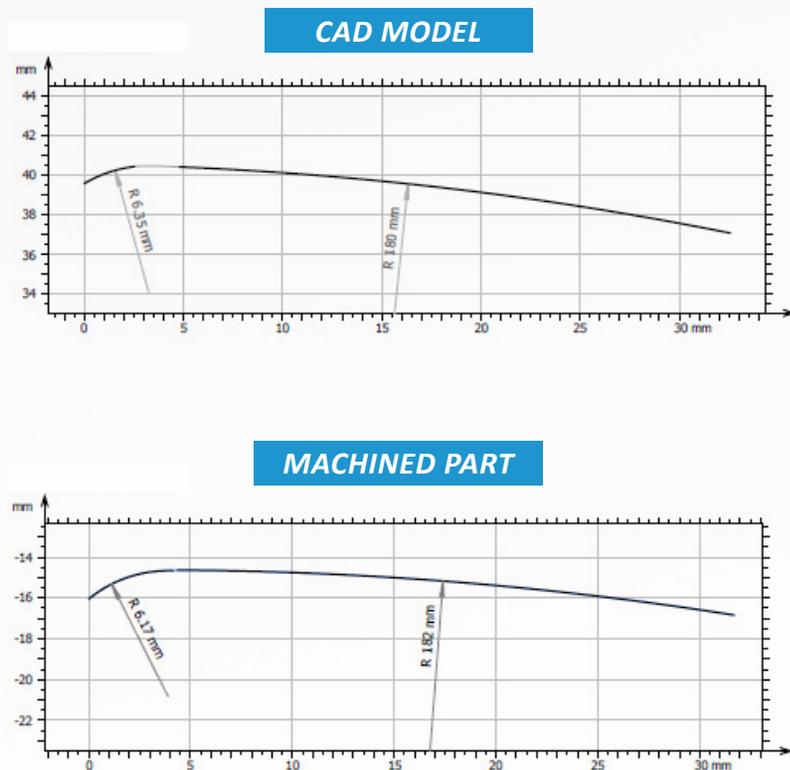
Extracted profiles (PROFILE 1) on the imported CAD model and machined part scan for dimensional comparative analysis
